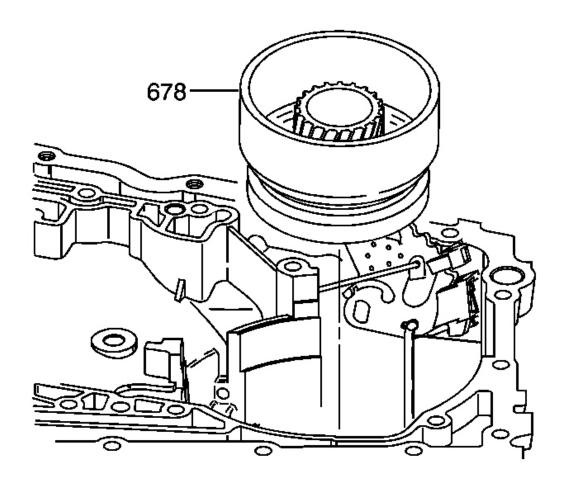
Installing Reaction Sun Gear And Drum Assembly Courtesy of GENERAL MOTORS CORP.
